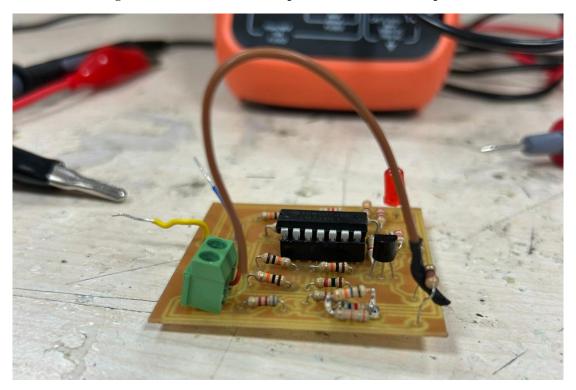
The Final Circuit Implemented on a PCB – Side View
